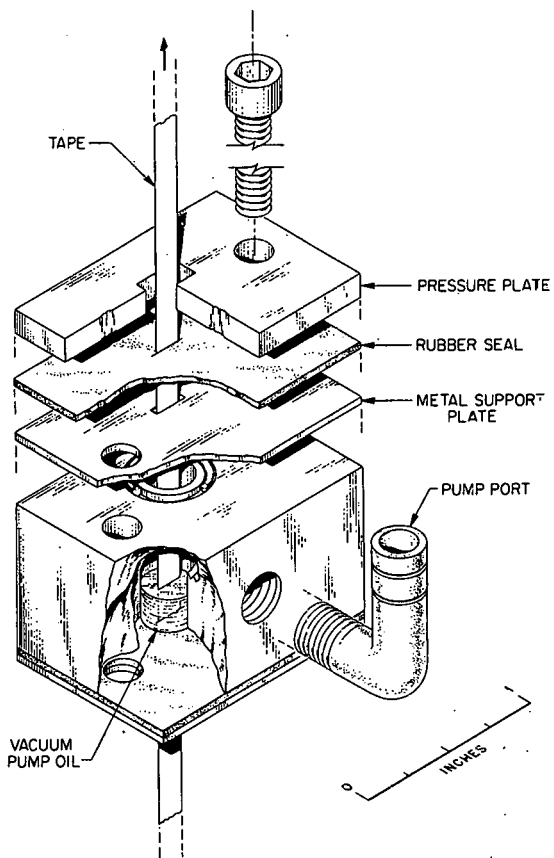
Tape vacuum seal used for quickly removing samples from the collection chamber
